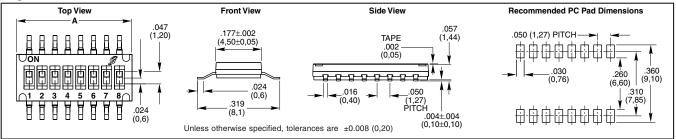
Series 97R DIMENSIONS In inches (and millimeters)
